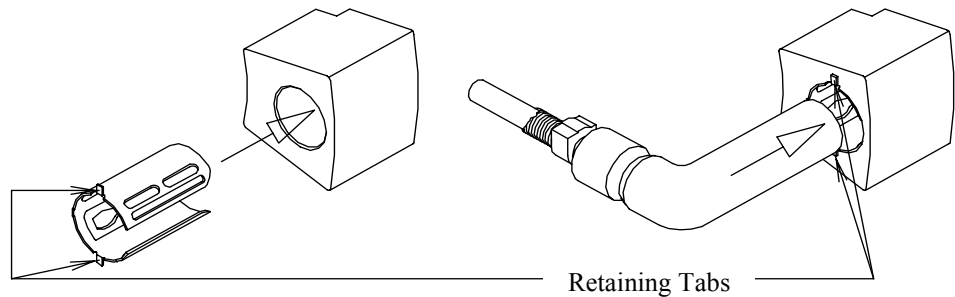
Sensor Clamping Sleeve and Sensor Installation
